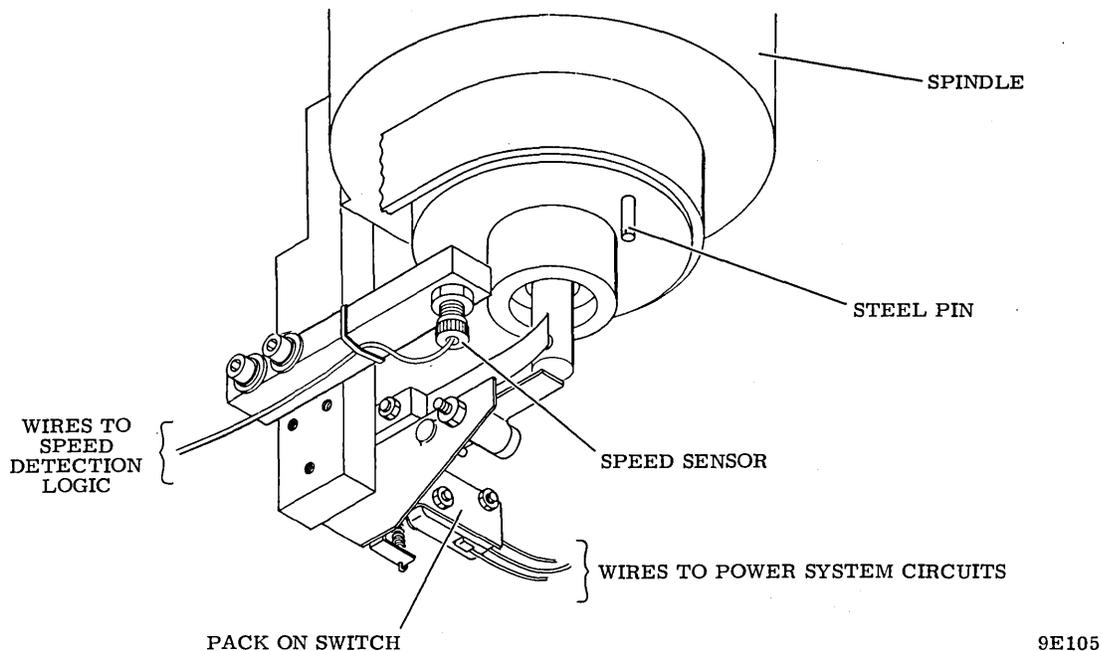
Speed Sensor and Pack On Switch Assemblies
